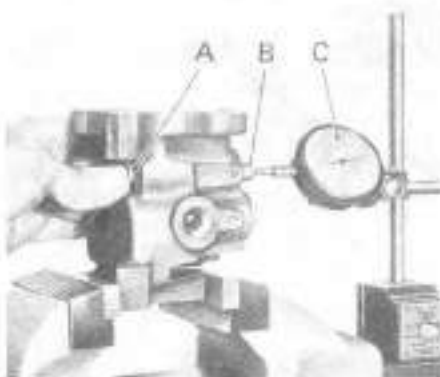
View showing dial indicator being used to adjust spool valve; refer to text for procedure.
